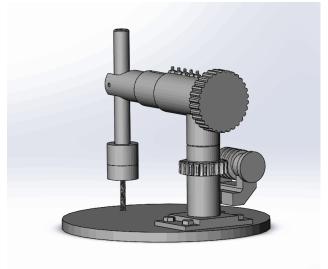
Prototype of AS-1, a threaded bolt manipulator
